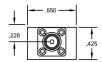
HL9447 with SMA DC bias port Mechanical Drawing
